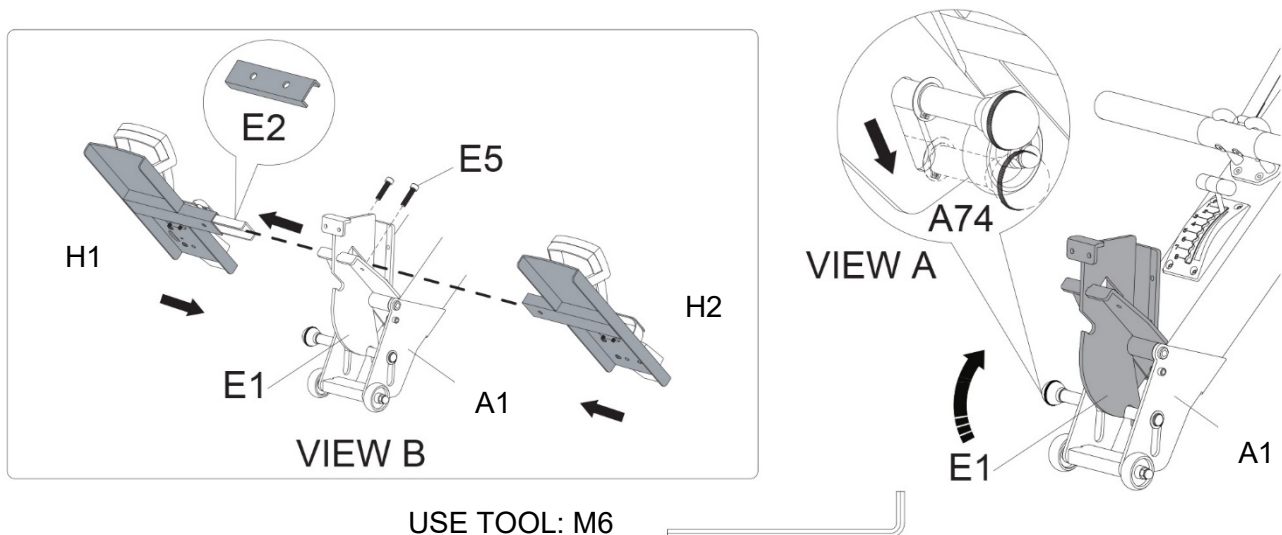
HOW TO ASSEMBLE THE FRONT STABILIZER
